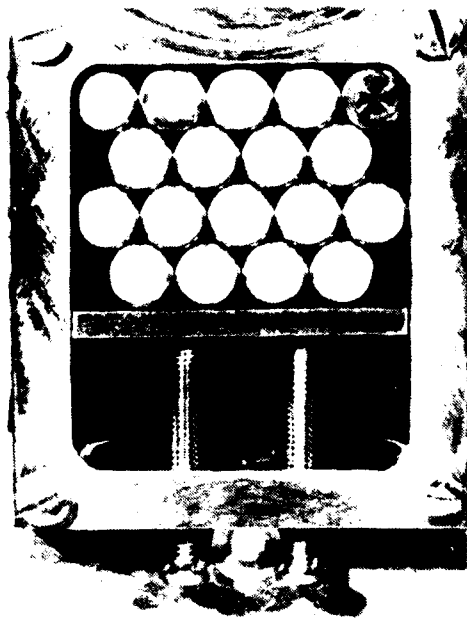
Photograph of implantation jig used to implant 18 T-58 bearing roller ends. Stainless steel frame is turned over to implant opposite ends of rollers. The aluminum base is water cooled.
